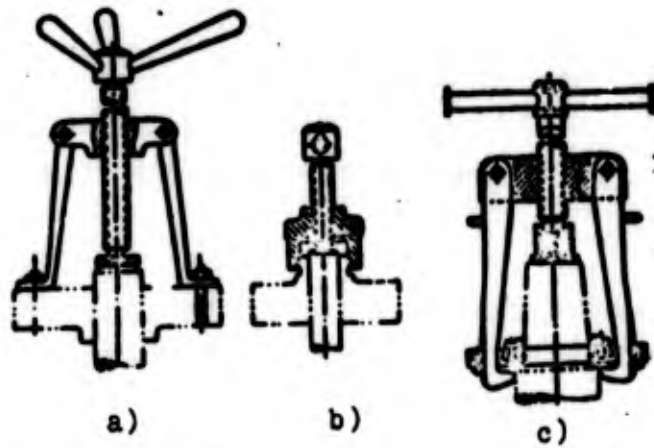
Model designs of stripper plates: a) secured by pins on the casing; b) screwed onto the thread of the casing; c) with hinged grips.
